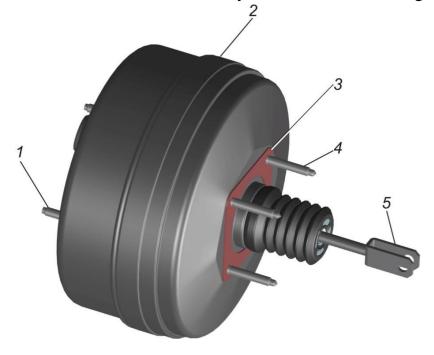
Vacuum booster: 1 - front stud (for securing brake master cylinder); 2 - vacuum booster housing; 3 - gasket; 4 - rear stud (for securing module to front panel); 5 - piston push rod
